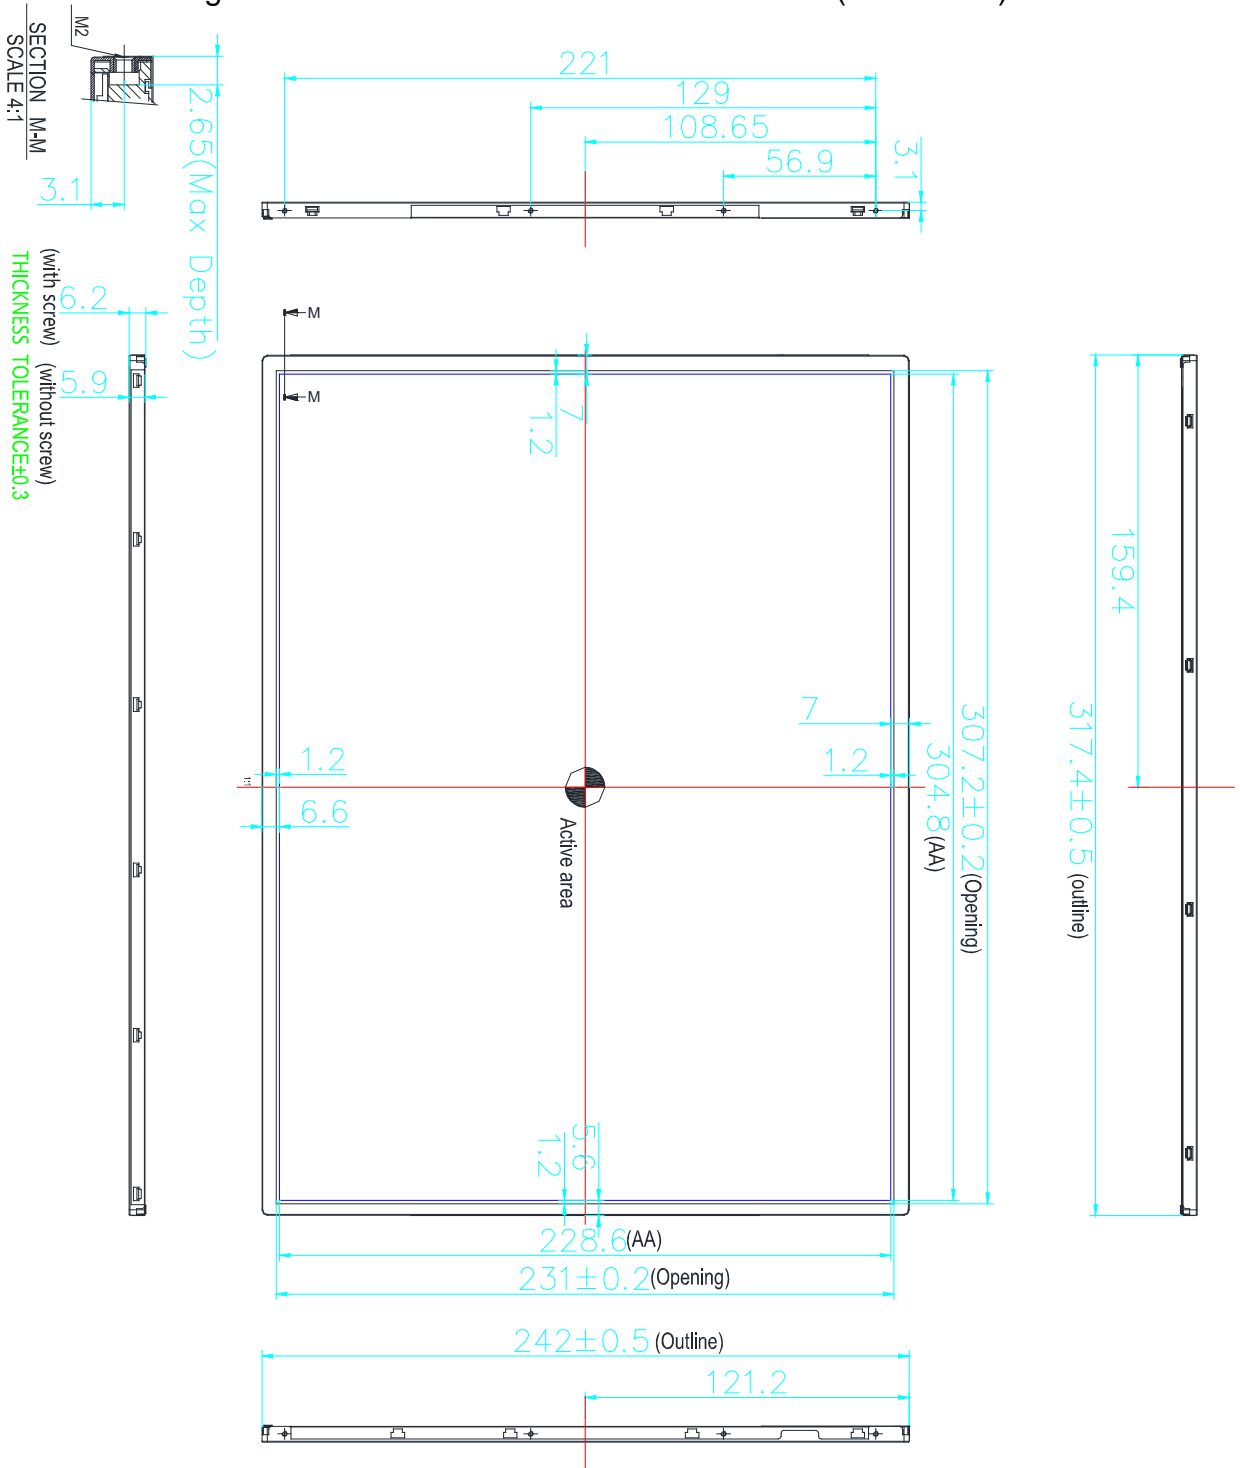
TFT-LCD Module Outline Dimensions (Rear view)
